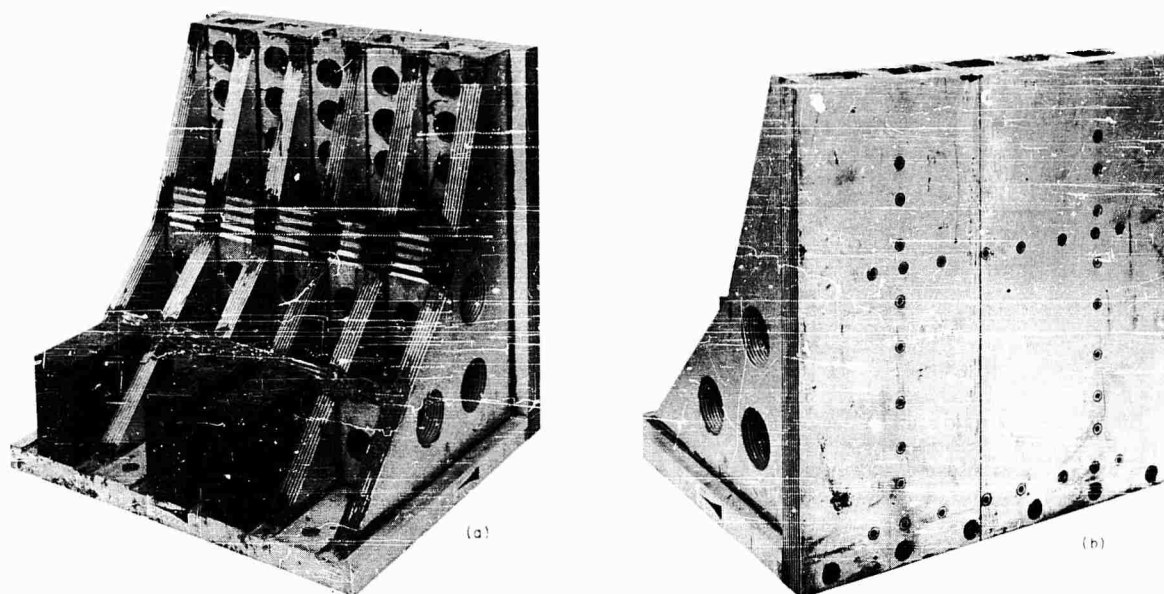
Laminated vibration fixture: (a) rear view, and (b) front plate
